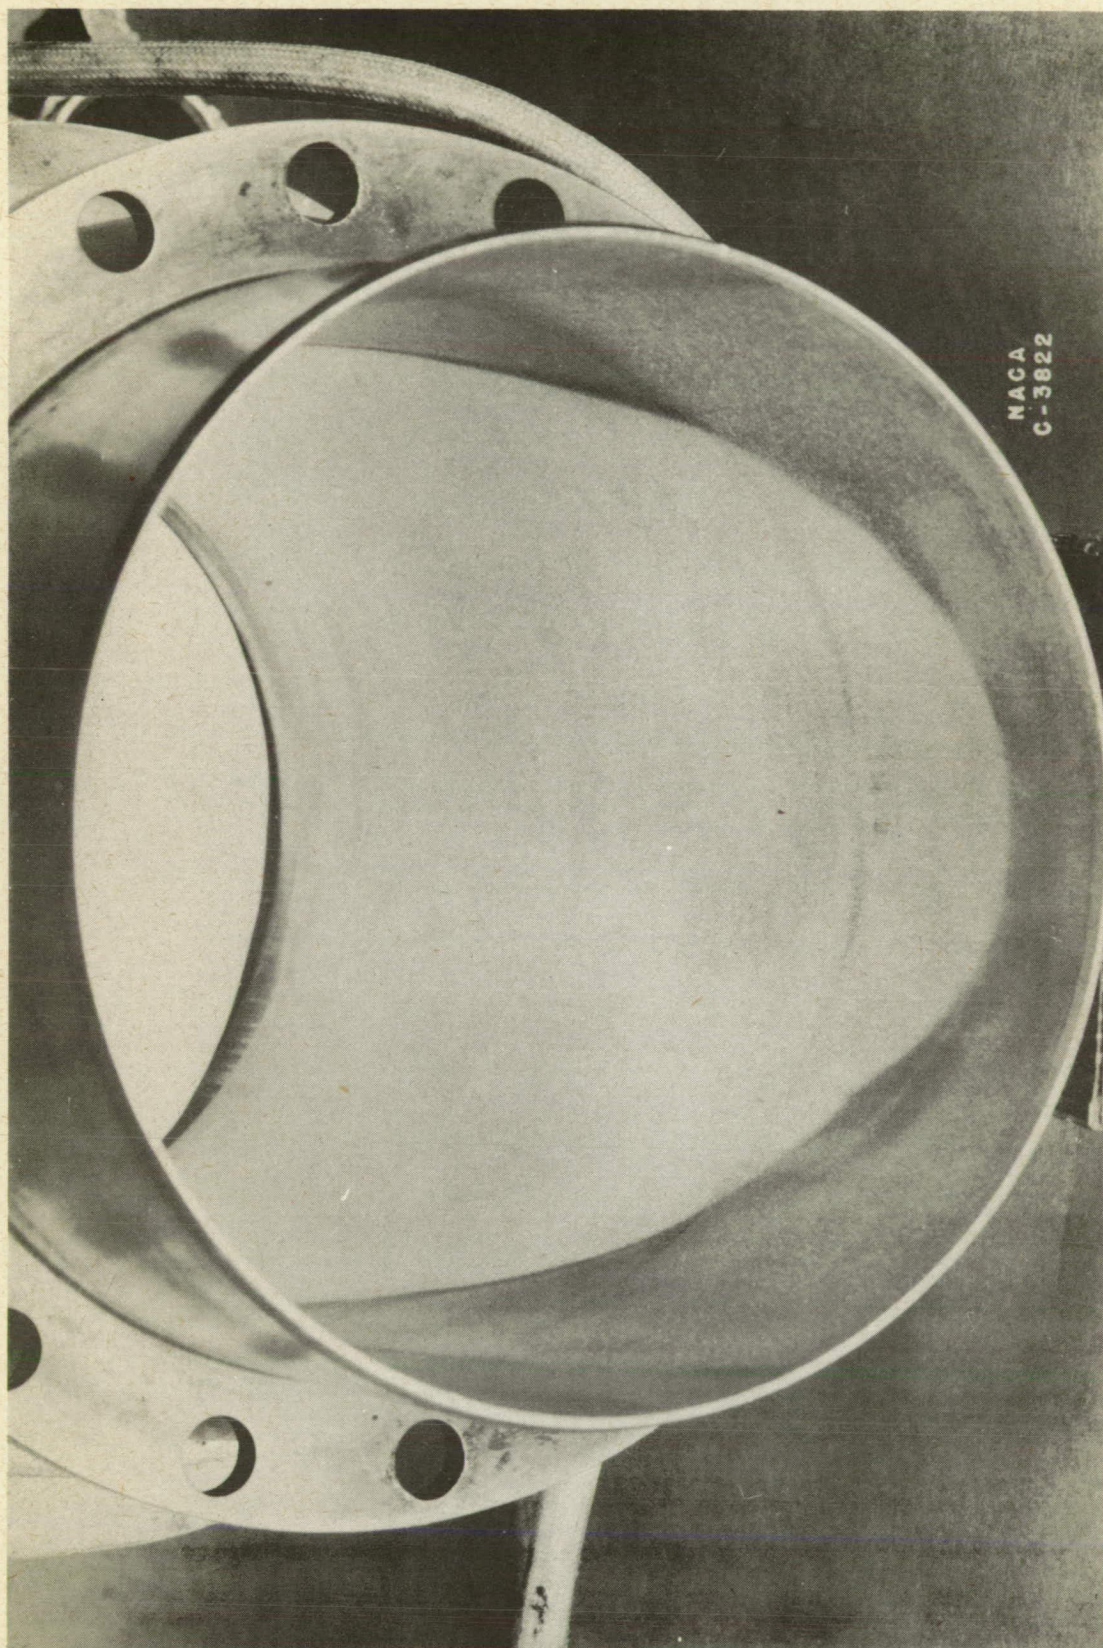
Condition of major-thrust face of straight-bore porous chrome-plated cylinder barrel after test 1. This condition is representative of condition of bore surfaces after all tests.
